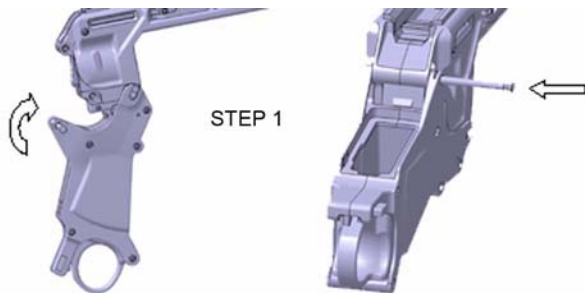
Install MK 13 MOD 0 Trigger Module.
